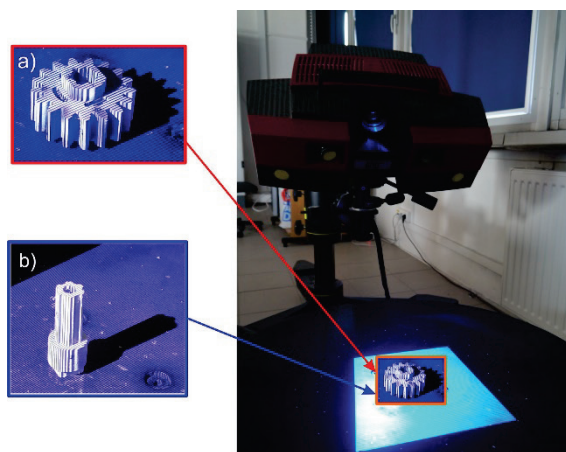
Measurement using the optical 3D scanner Atos II Triple Scan: a) Gear, b) shaft
